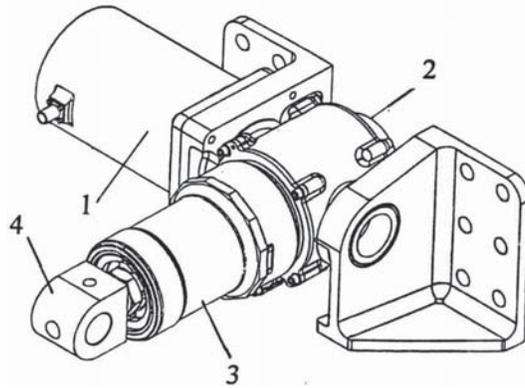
Electromechanical actuator for flight control surfaces: 1 — brushless motor, 2 — gearbox, 3 — ball lead screw, 4 — clevis or spherical joint end.
